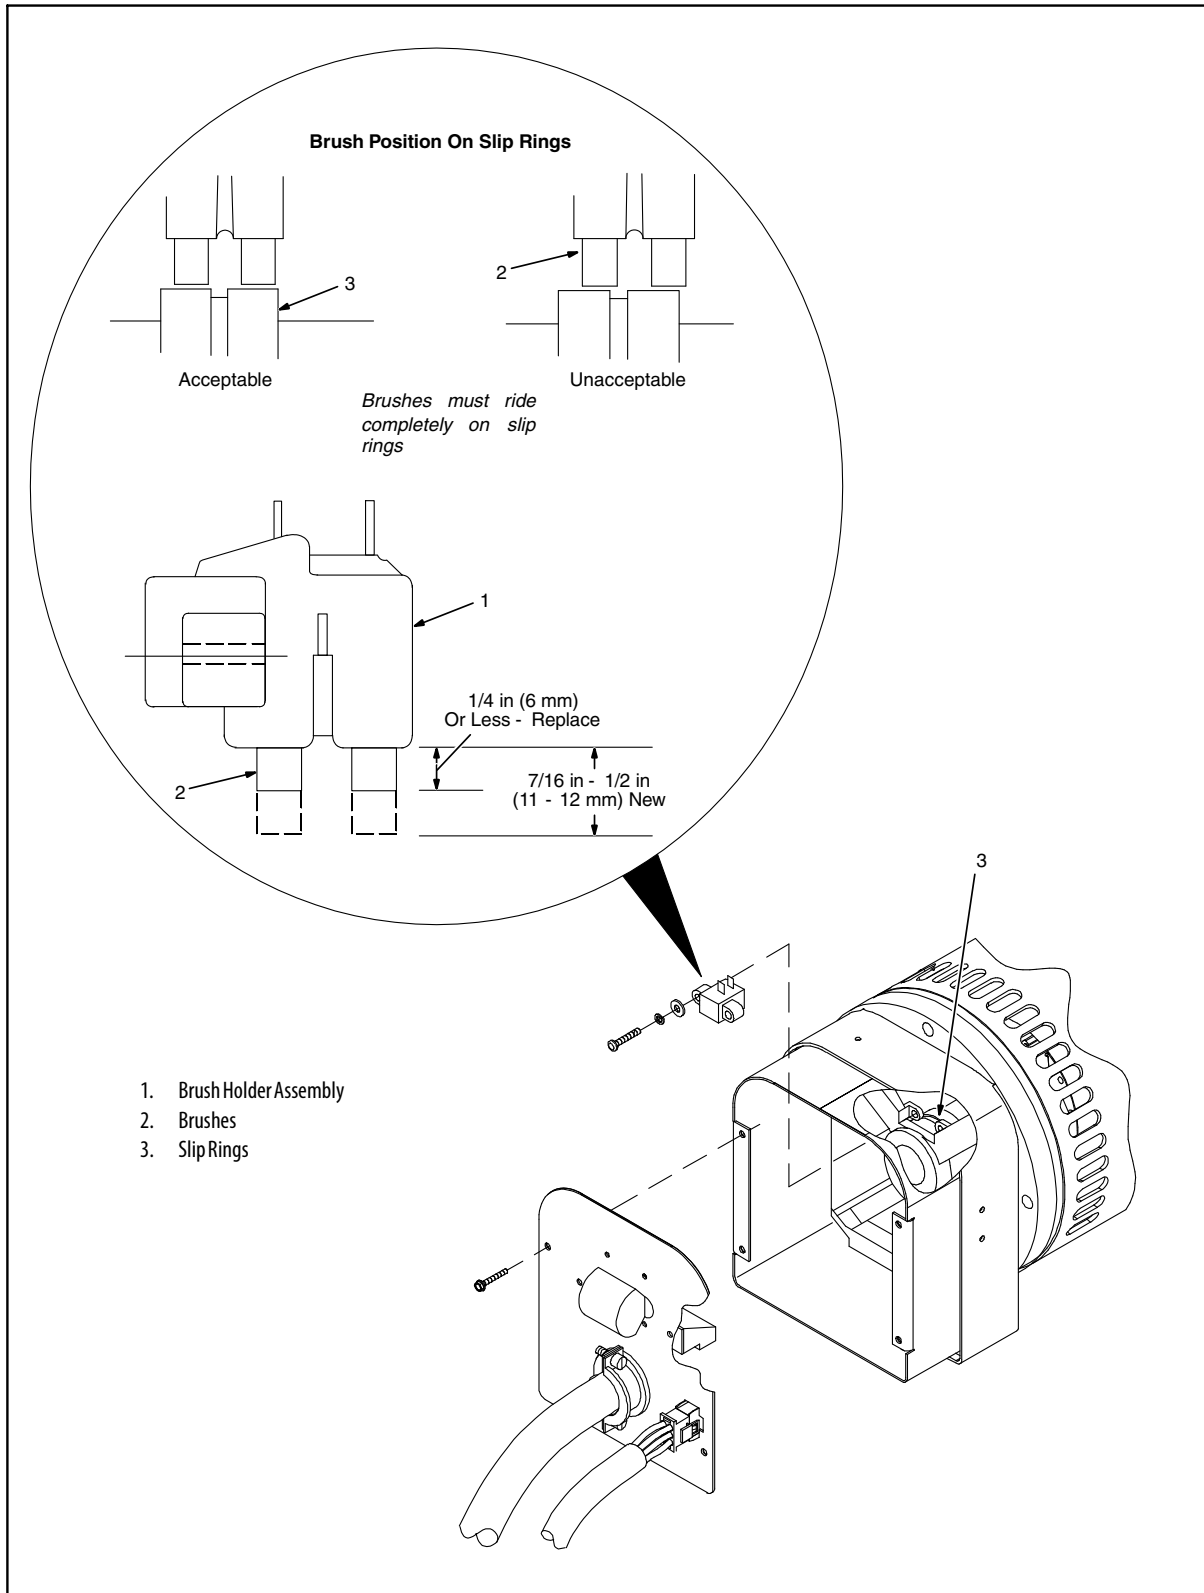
Inspecting Generator Brushes, Replacing Brushes, and Cleaning Slip Rings
